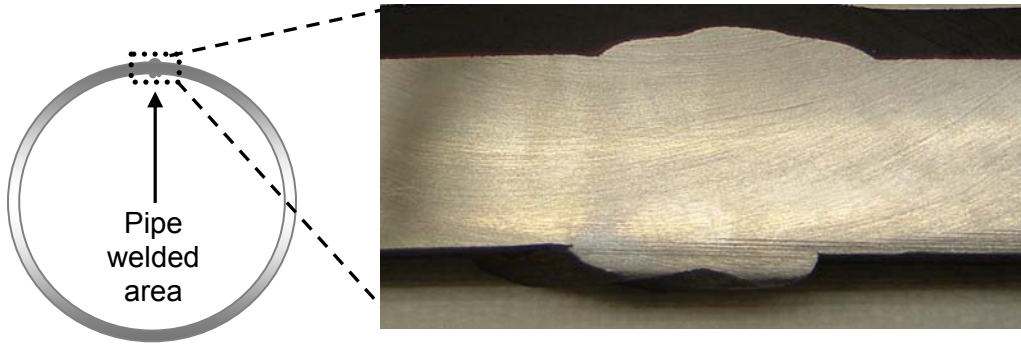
Cross Section of a Typical Weld on a Pipe
